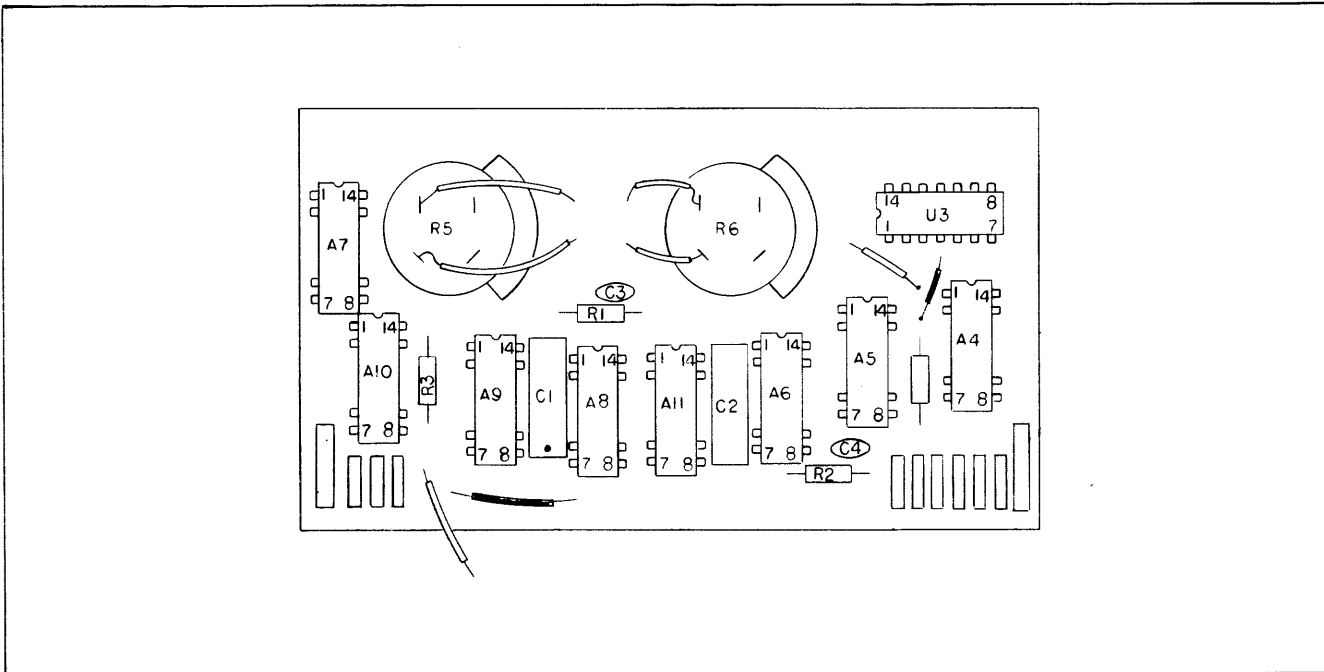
A12 Remote Control Unit #2 PCB Assembly
